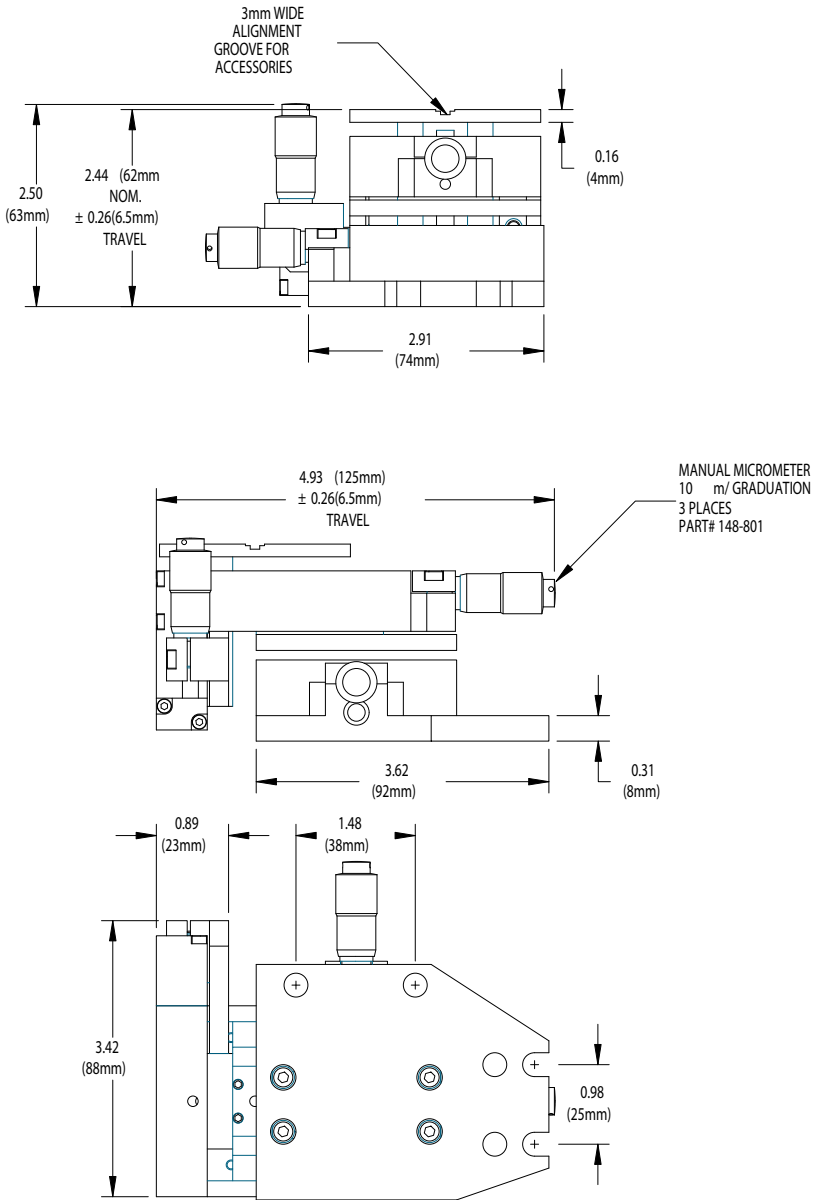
RB13M Micrometer RollerBlock Dimensions
